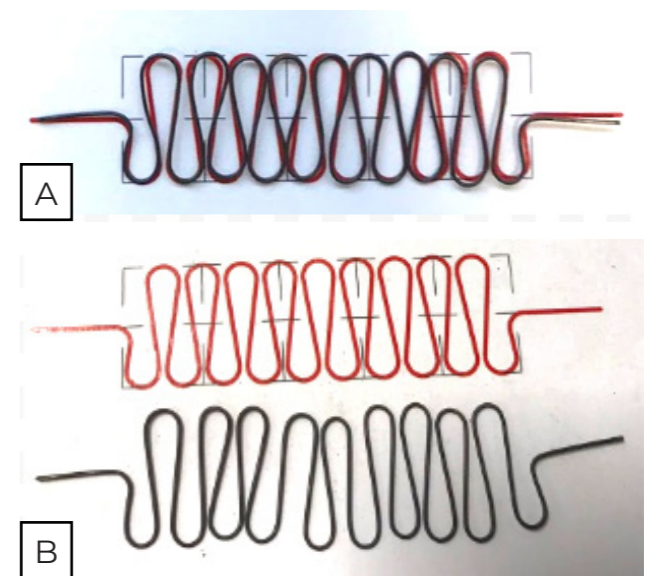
[A] HAND FORMED SMA ZIGZAG SPRINGS BEFORE ANNEALING, [B] SAME ZIGZAG SPRINGS THAT MORPHED DURING THE ANNEALING PROCESS
